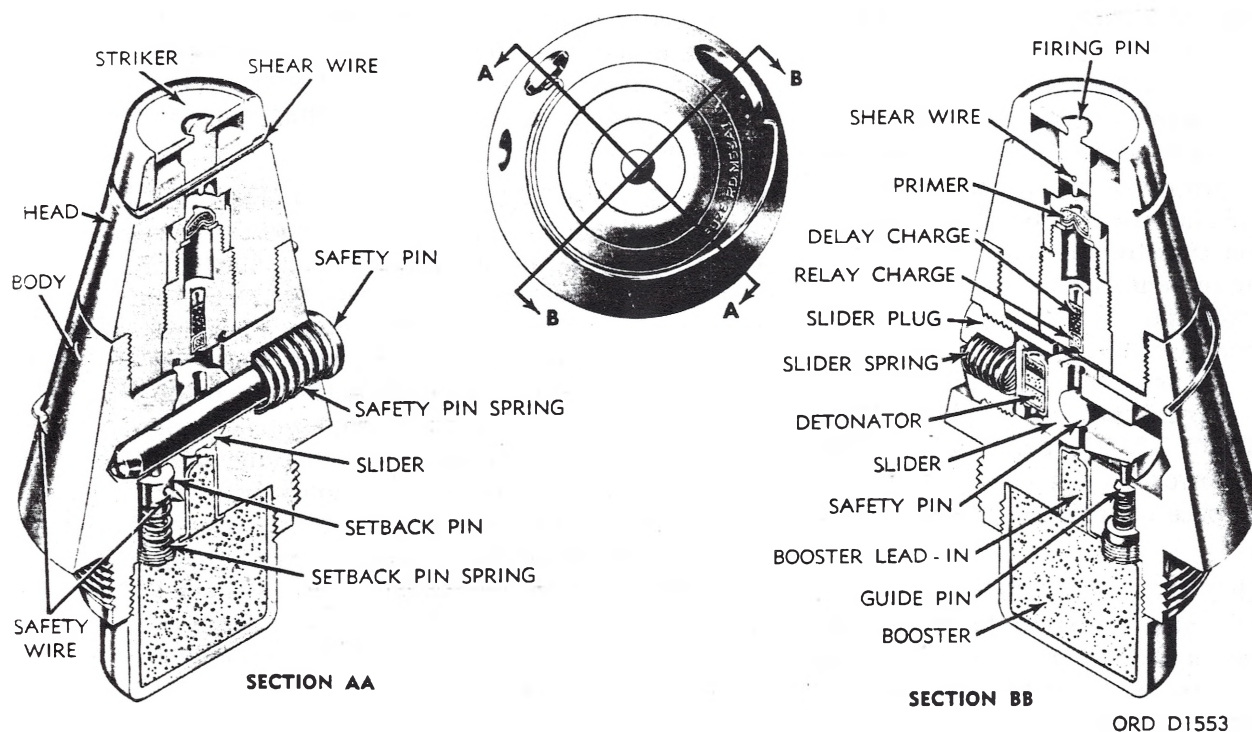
Fuze M53A1, Cutaway View Showing Unarmed Condition
